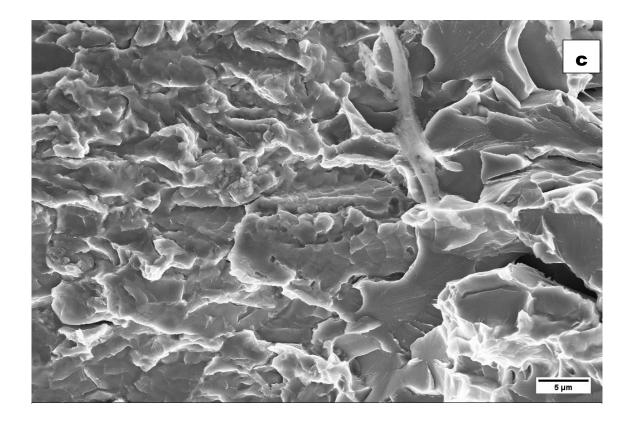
Fracture surface analysis for Test 1 ($K_{max} = 33 \text{ MPa}\sqrt{m}$) in NNpH environment. Large striations were observed on the fracture surface. Fracture direction is left to right. [17]
